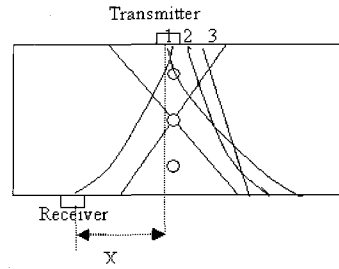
Extent of beam Skewing in 75 mm thick Weld
